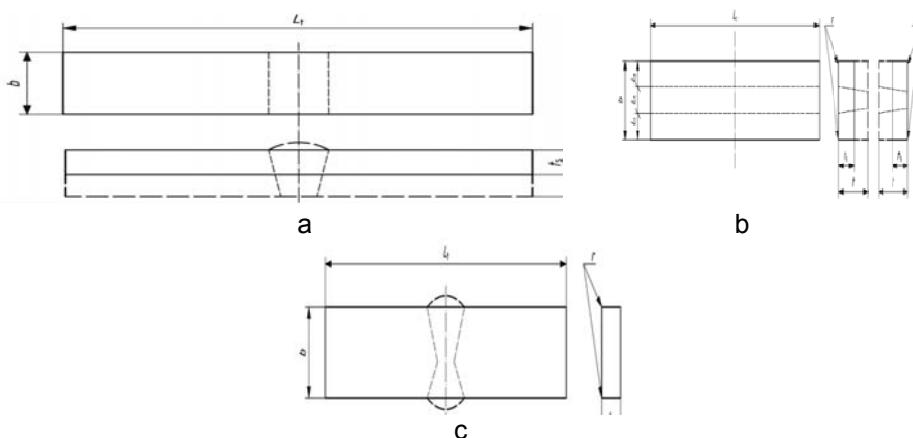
(a-c) a. Transverse root bend test specimen for a butt weld (TRBB) b. Longitudinal bend test specimen for a butt weld (LFB and LRB) c. Transverse side bend test specimen for a butt weld (SBB)
